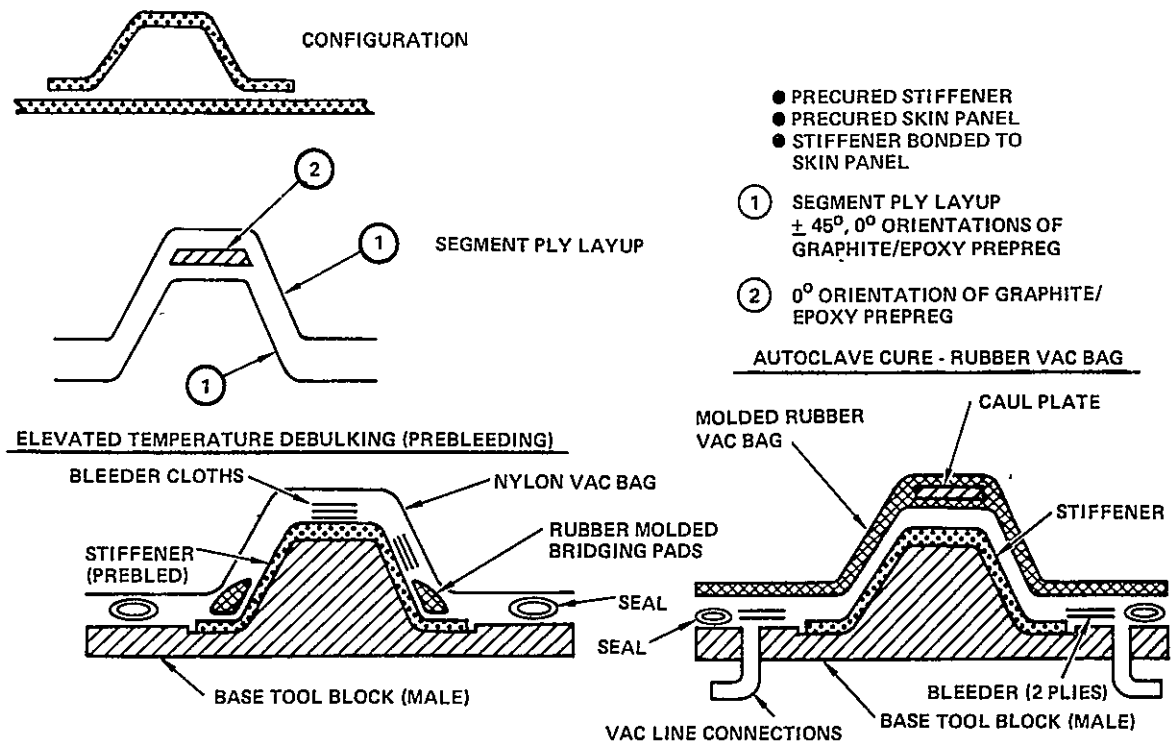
Hat Section Stiffened Skin Cover - Male Tool Concept
